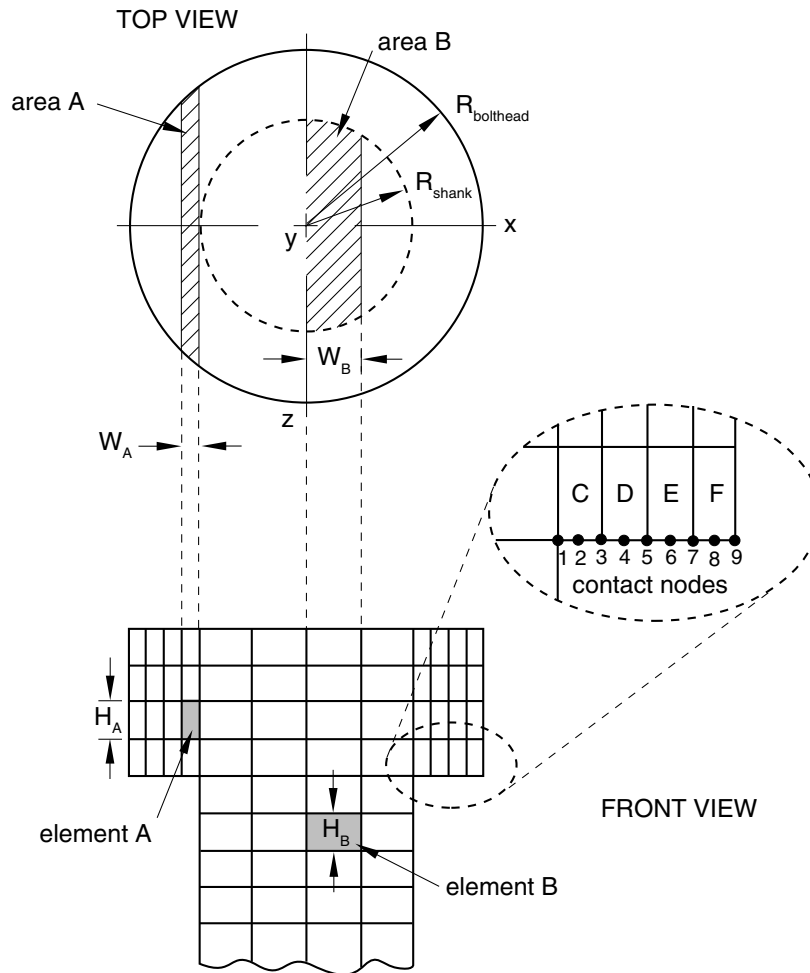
Cross-sectional views of the bolt head and the shank.
